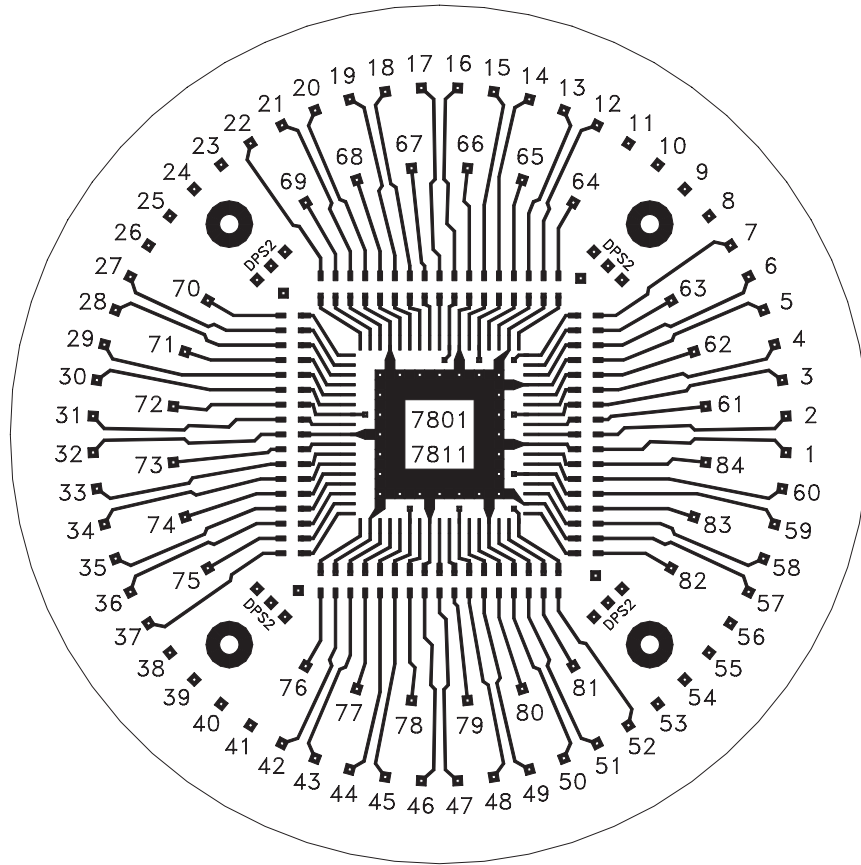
Topside of the ac-Test DUT Board for the FIFO SN74ACT7801FN in 68-Pin PLCC Package
